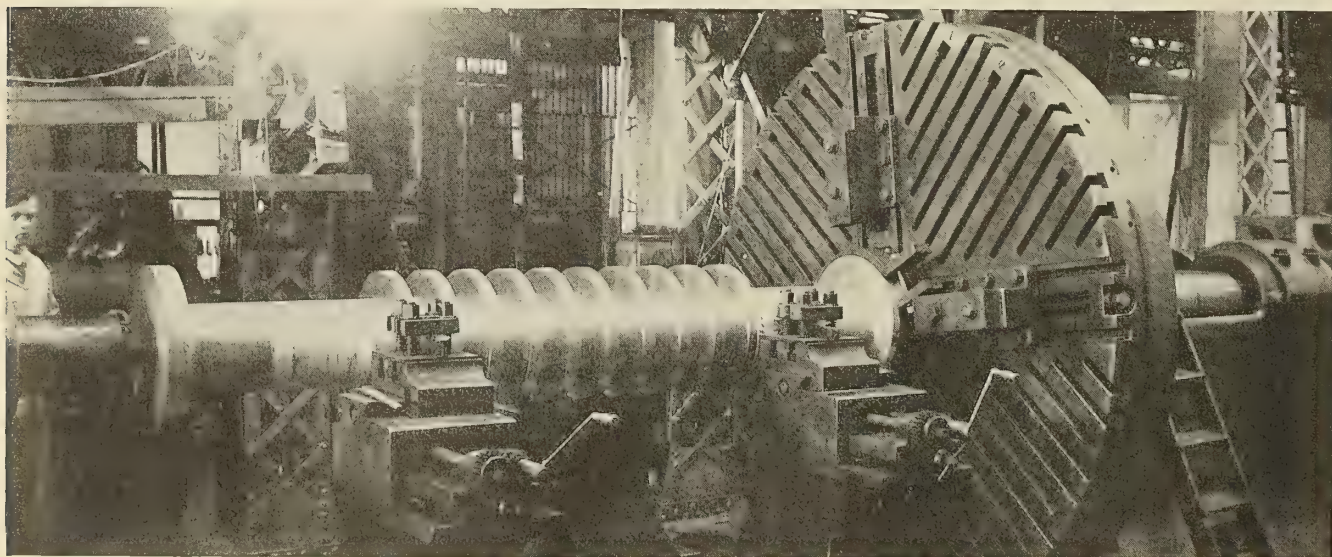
Turning a Thrust Shaft Where Four Tools Are Used Simultaneously When Roughing
